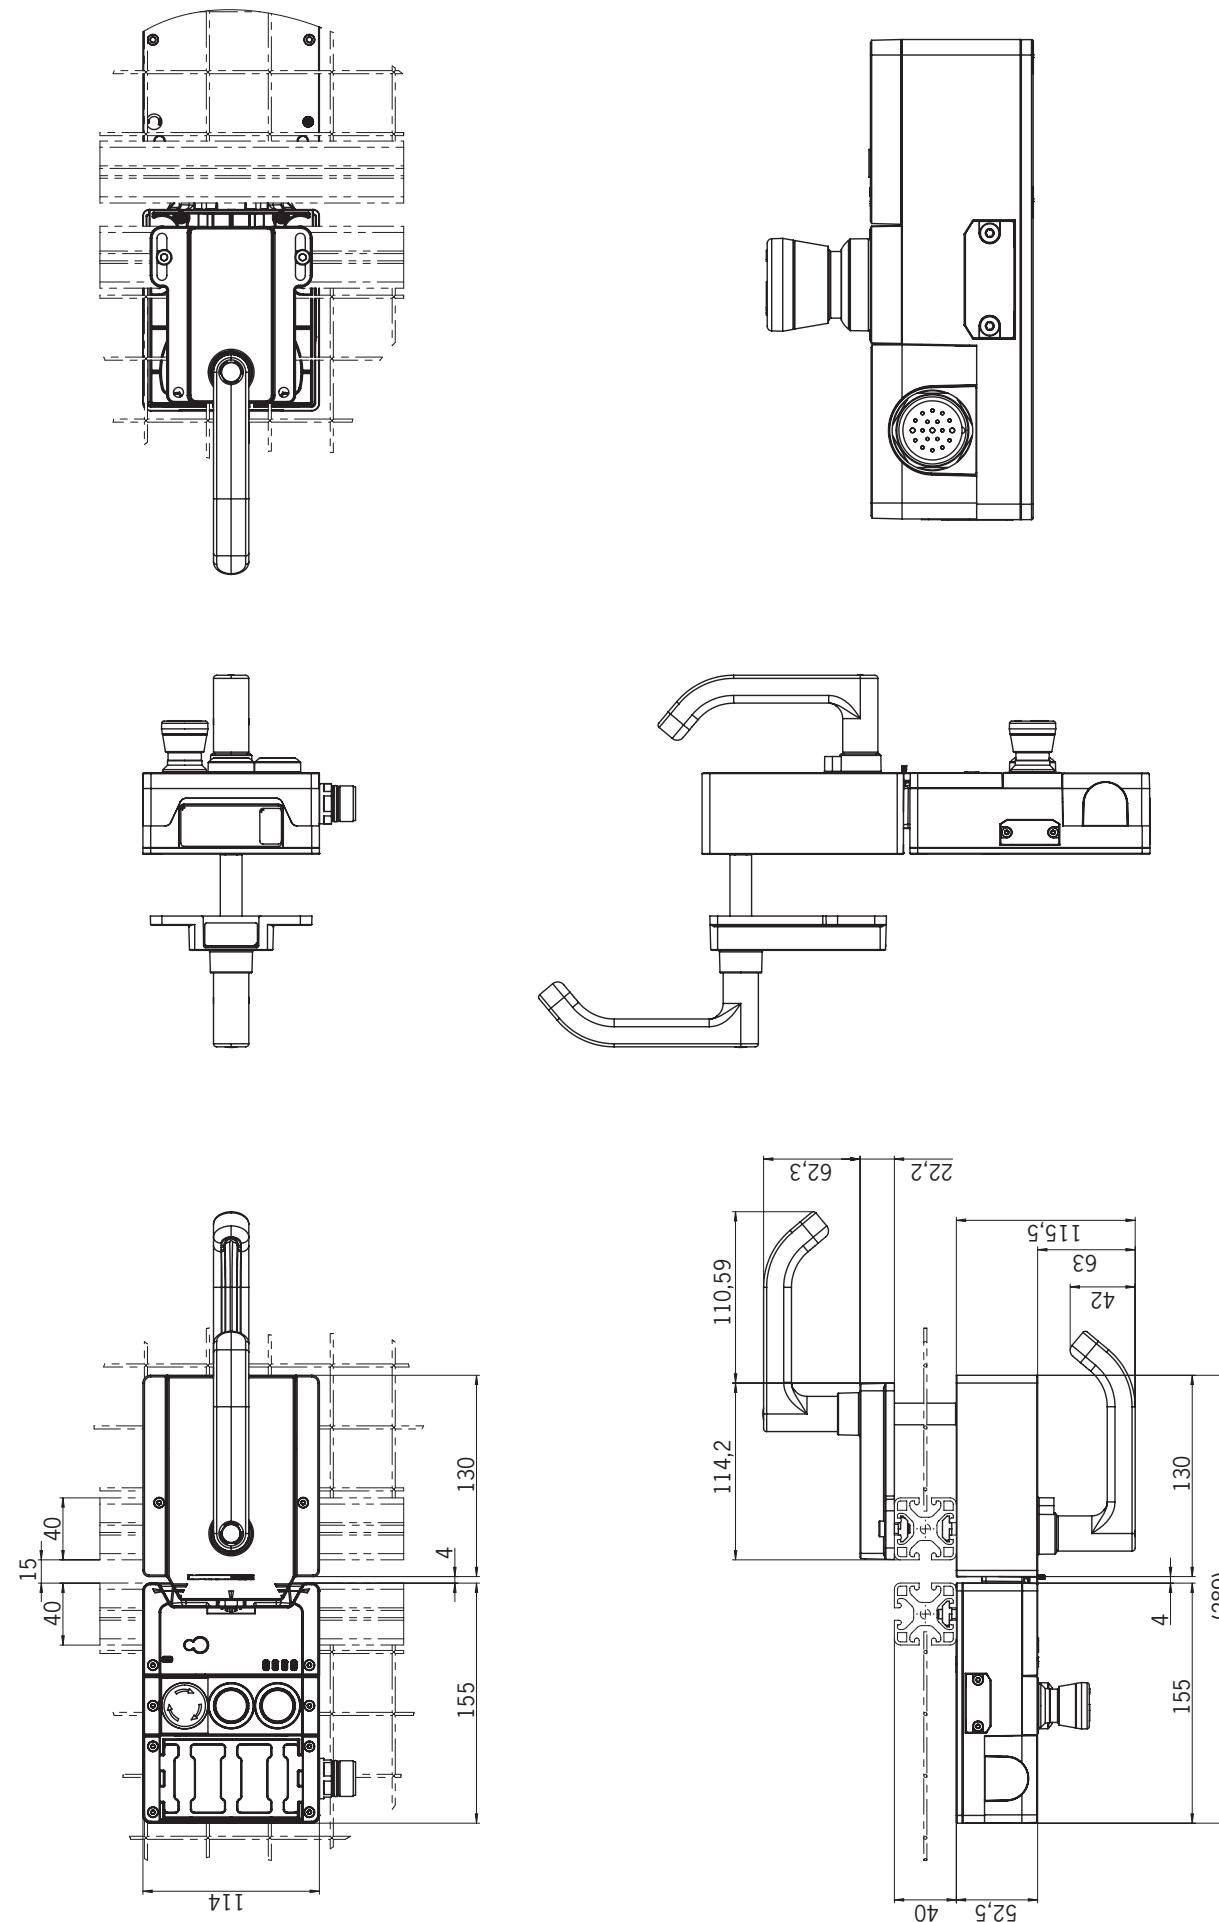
Dimension drawing MGB2 fitted, without optional mounting plates
